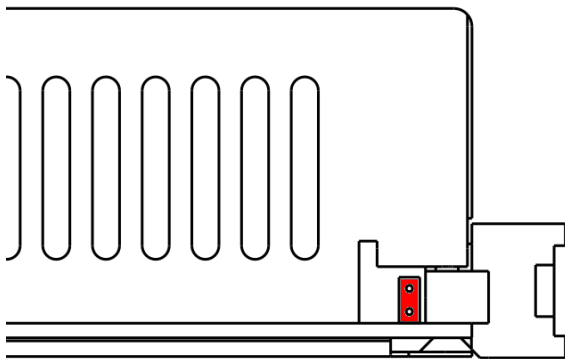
detail view of Figure 6: view of the top (Jumper red marked)
